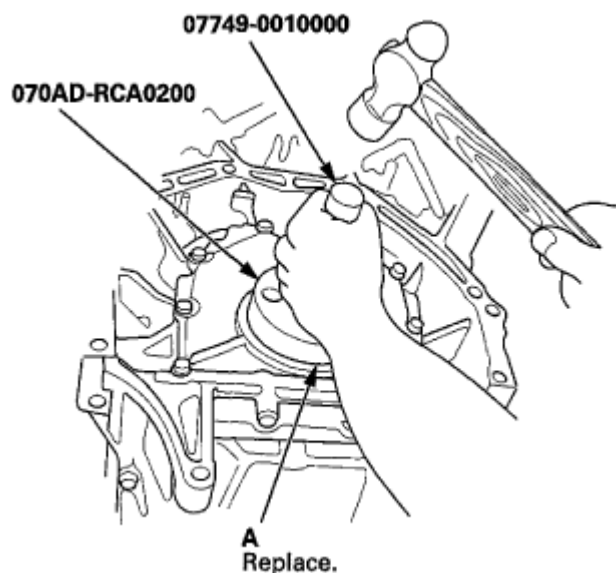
Installing Transmission End Crankshaft Oil Seal Using Oil Seal Driver And Hammer
